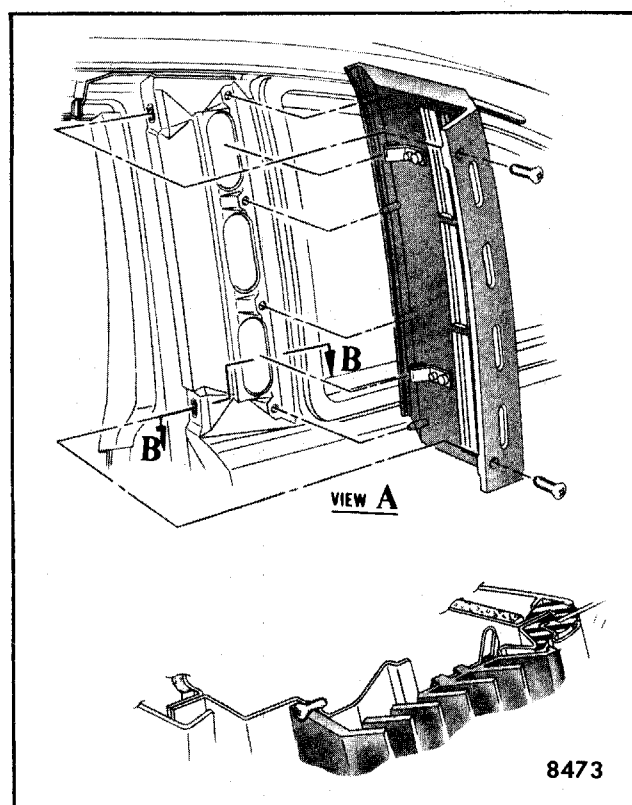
Louver Assembly - "X-17 and Standard X-27" Styles
